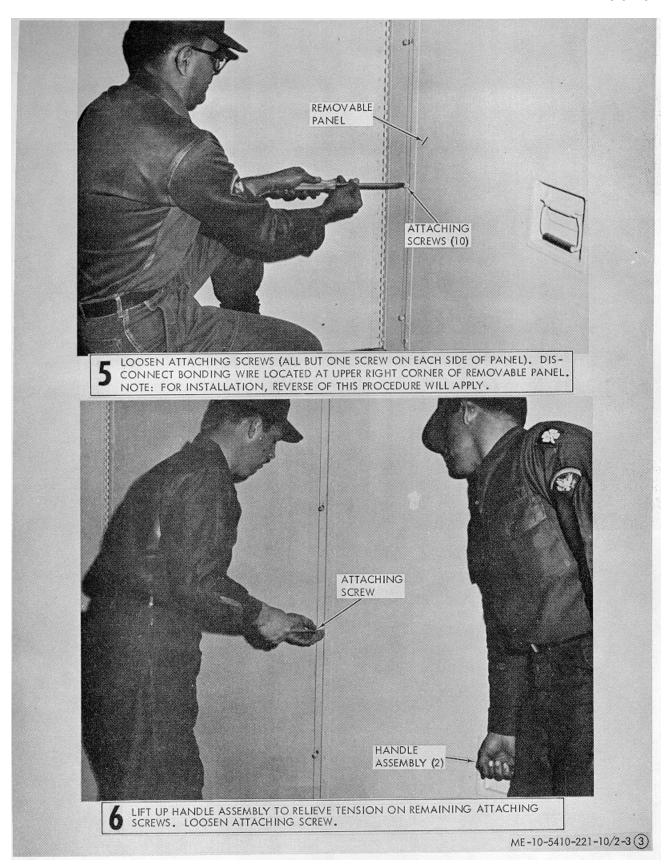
(3). Interchanging removable panels and swinging door panels (Sheet 3 of 4).
